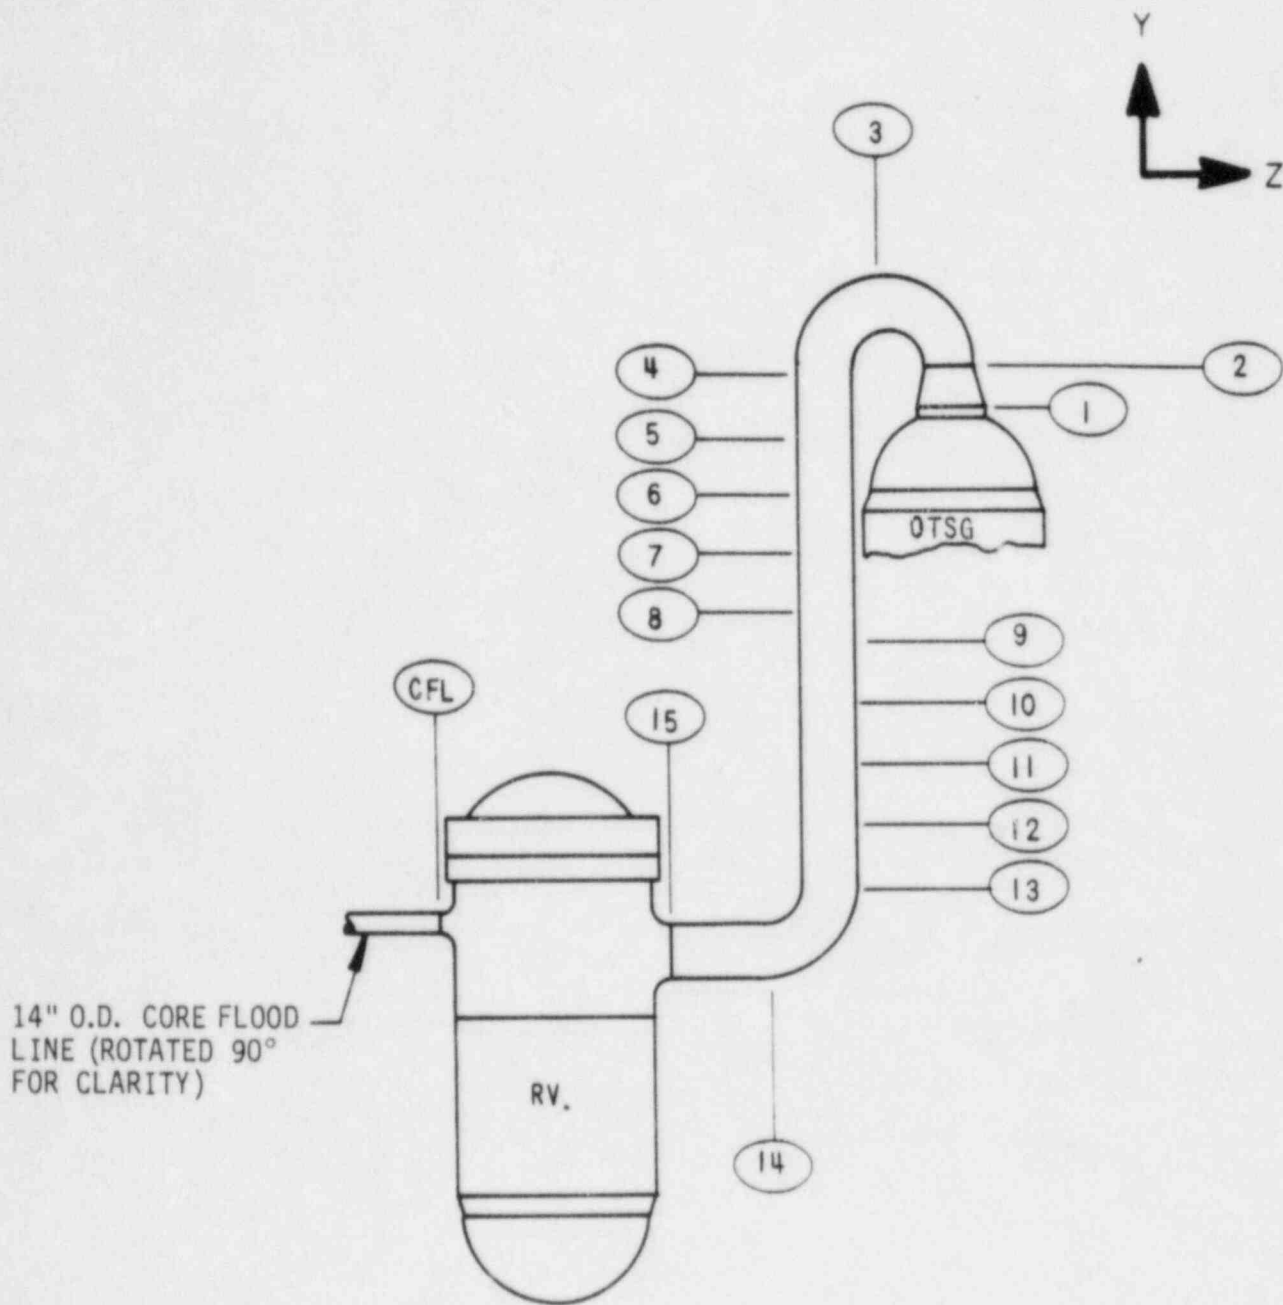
205-FA Plant Cold Leg Weld Locations
